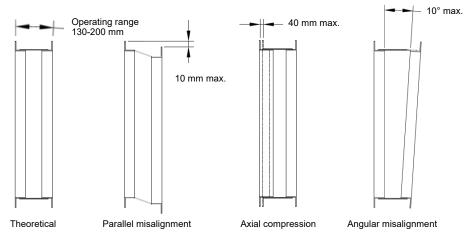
Assembly tolerances for flexible joints
